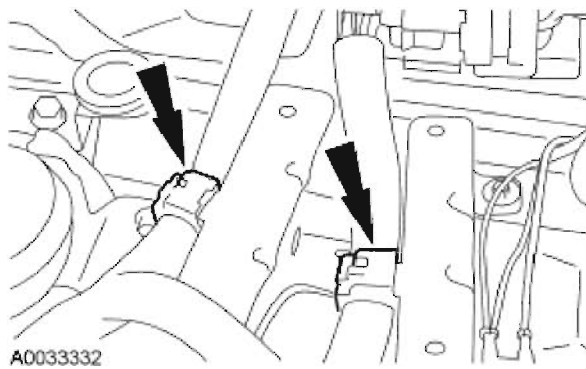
Locating Shift Cable End At Manual Lever
